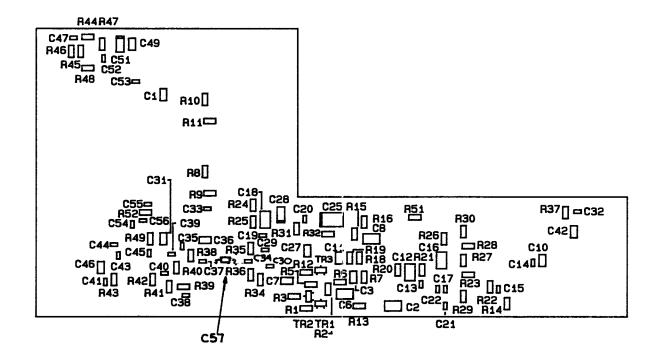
Receiver Module: IF Demodulator Board Side B Layout
